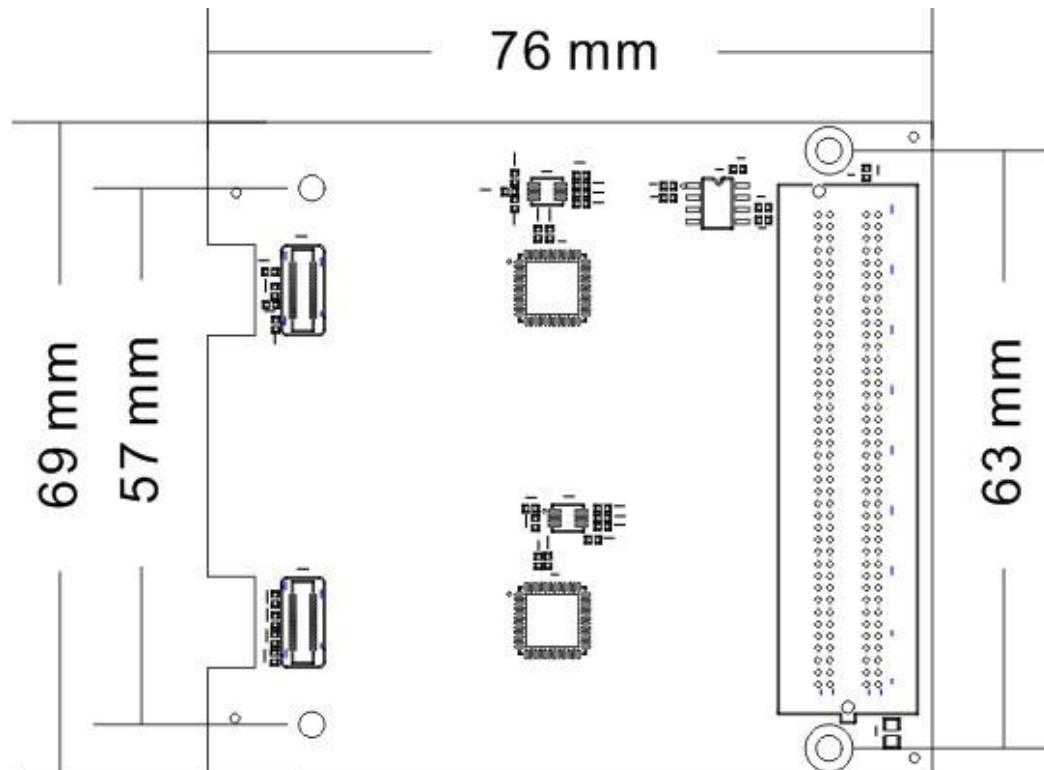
FL0214 Binocular MIPI Camera Module Dimensions
